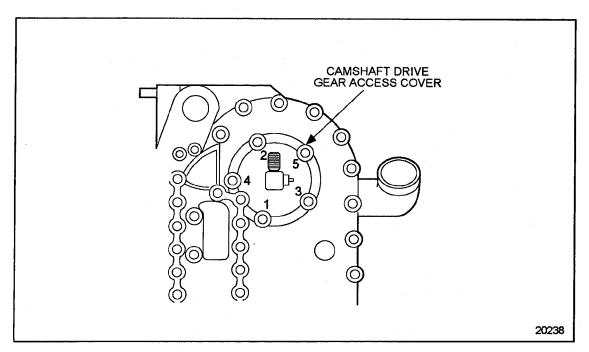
Camshaft Drive Gear Access Cover Torque Sequences
